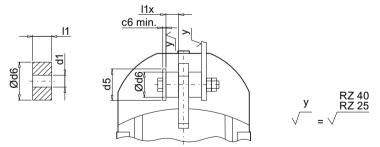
Mounting suggestion for torque arms on F.29 - F.149
